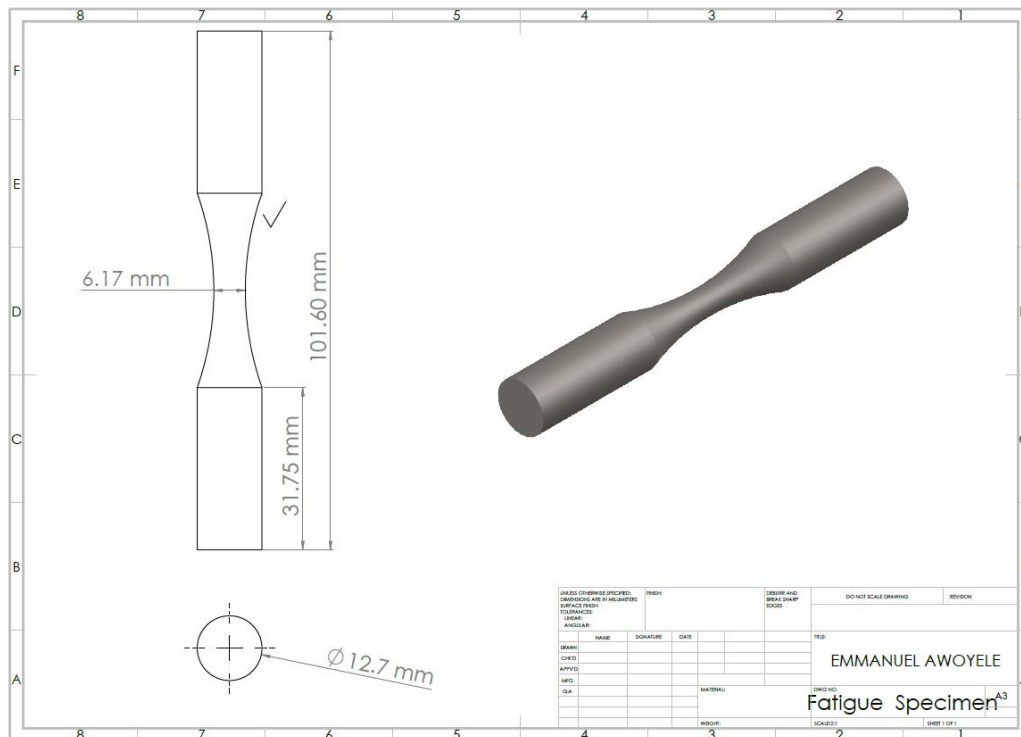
Drawing of a typical fatigue specimen used in the present study.
